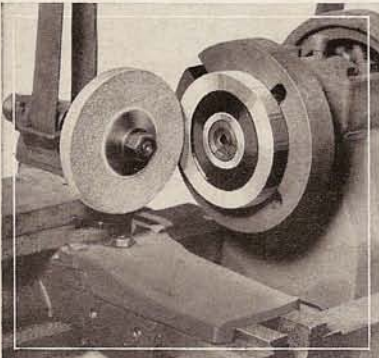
Sharpening a Slitting Cutter on the Face Plate of a 9-in. Junior Lathe
